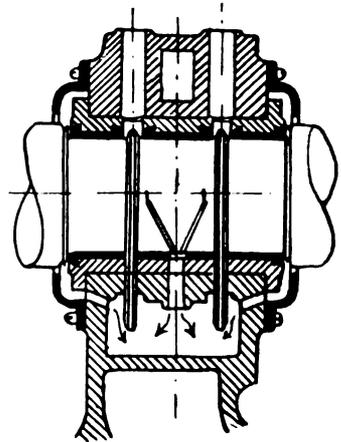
Section of main Bearing, with two Oiling Rings.
